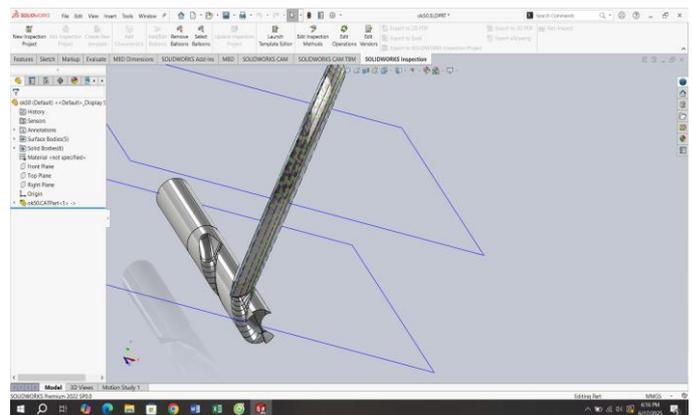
Grinding disk 3D model was loaded to Solidworks (D = 50)
